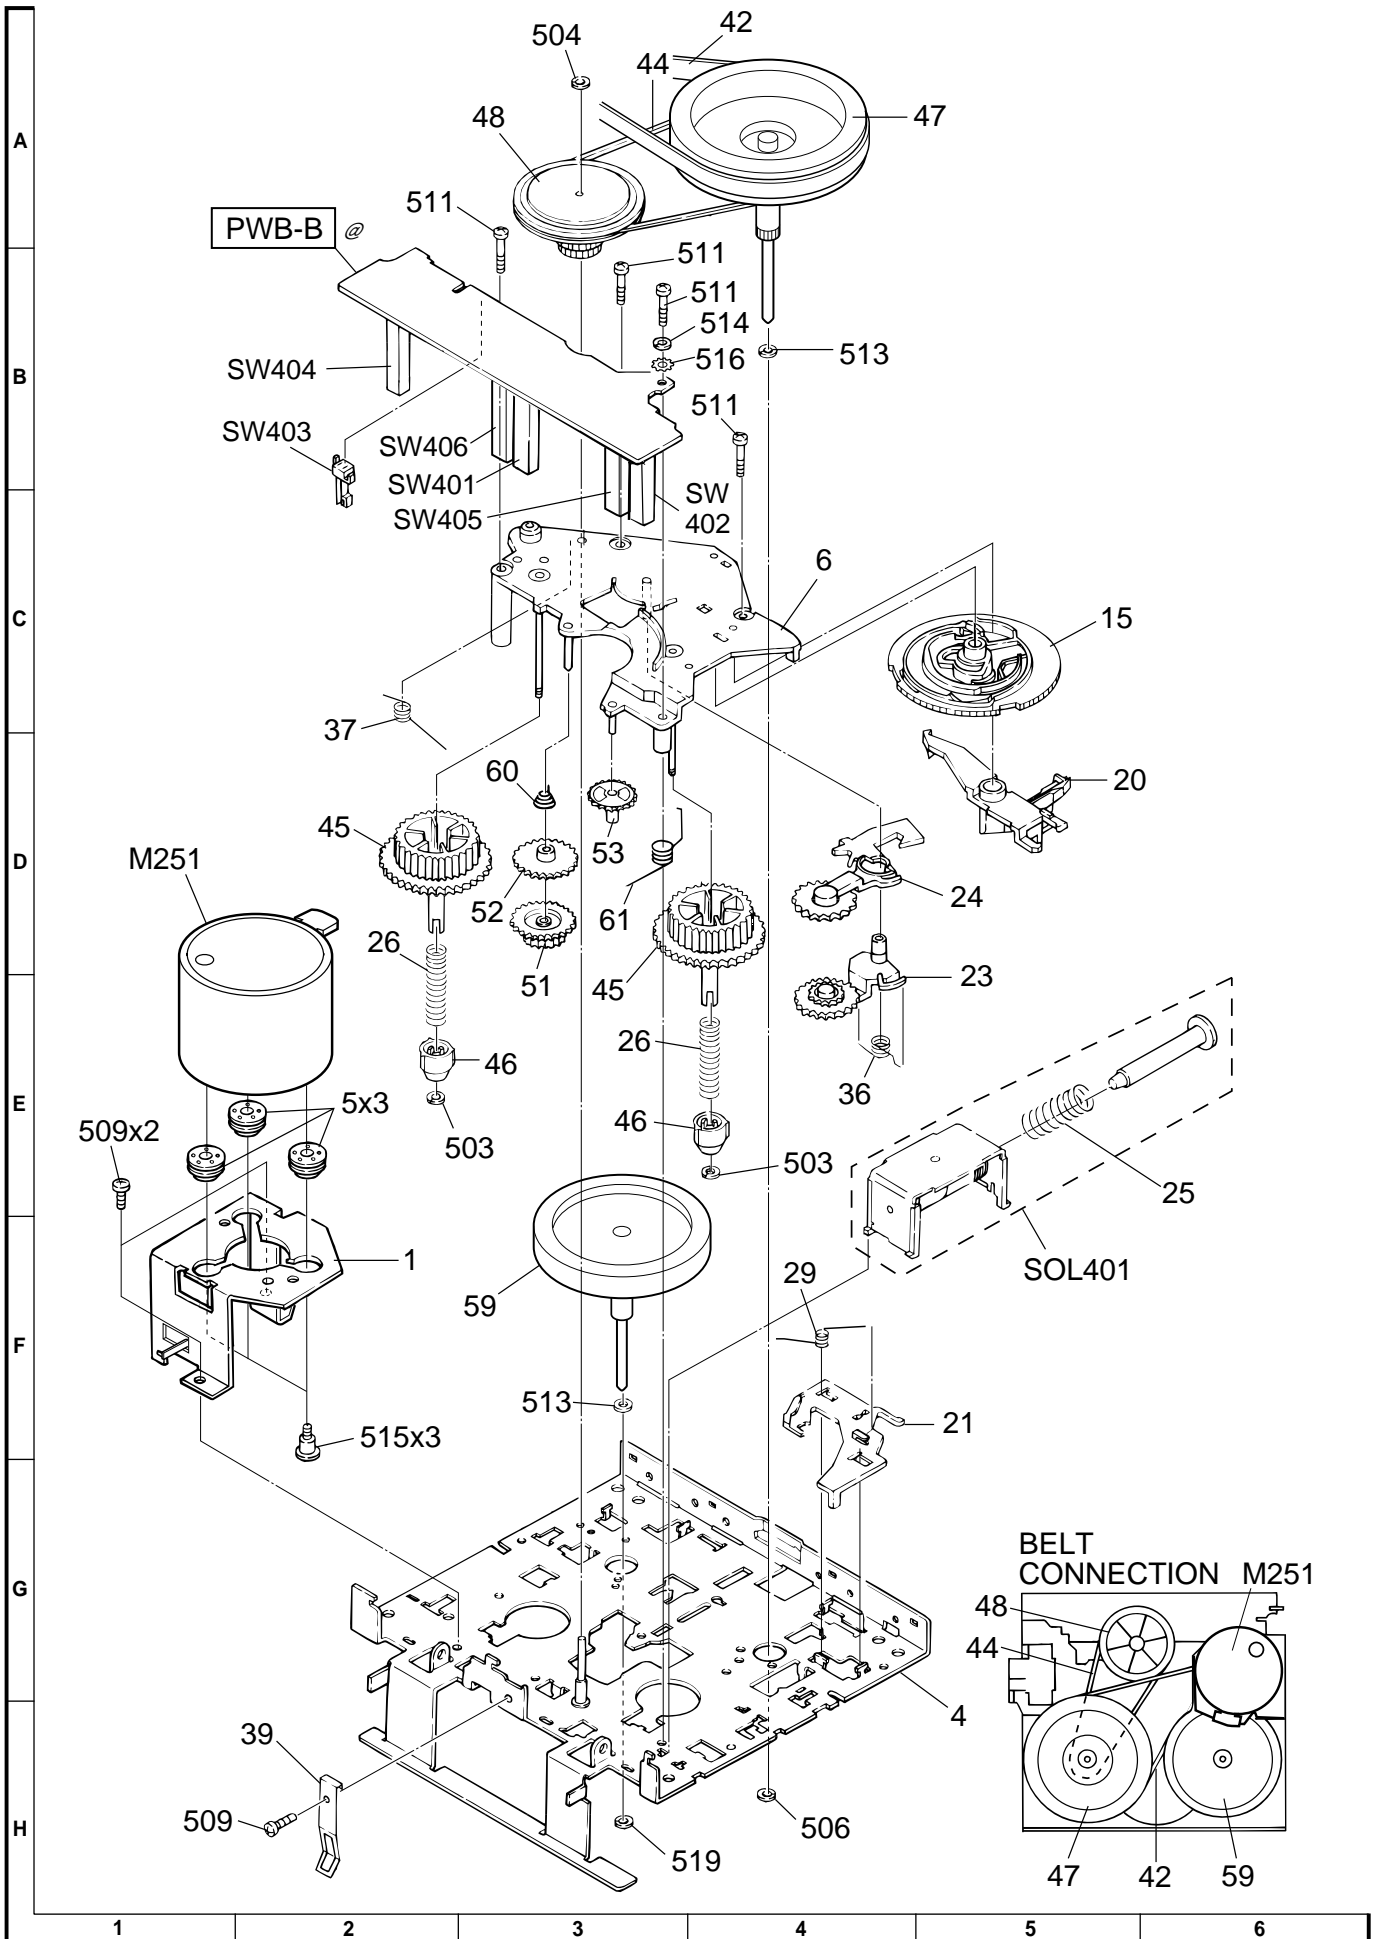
MECHANISM EXPLODE VIEW (2/2)
